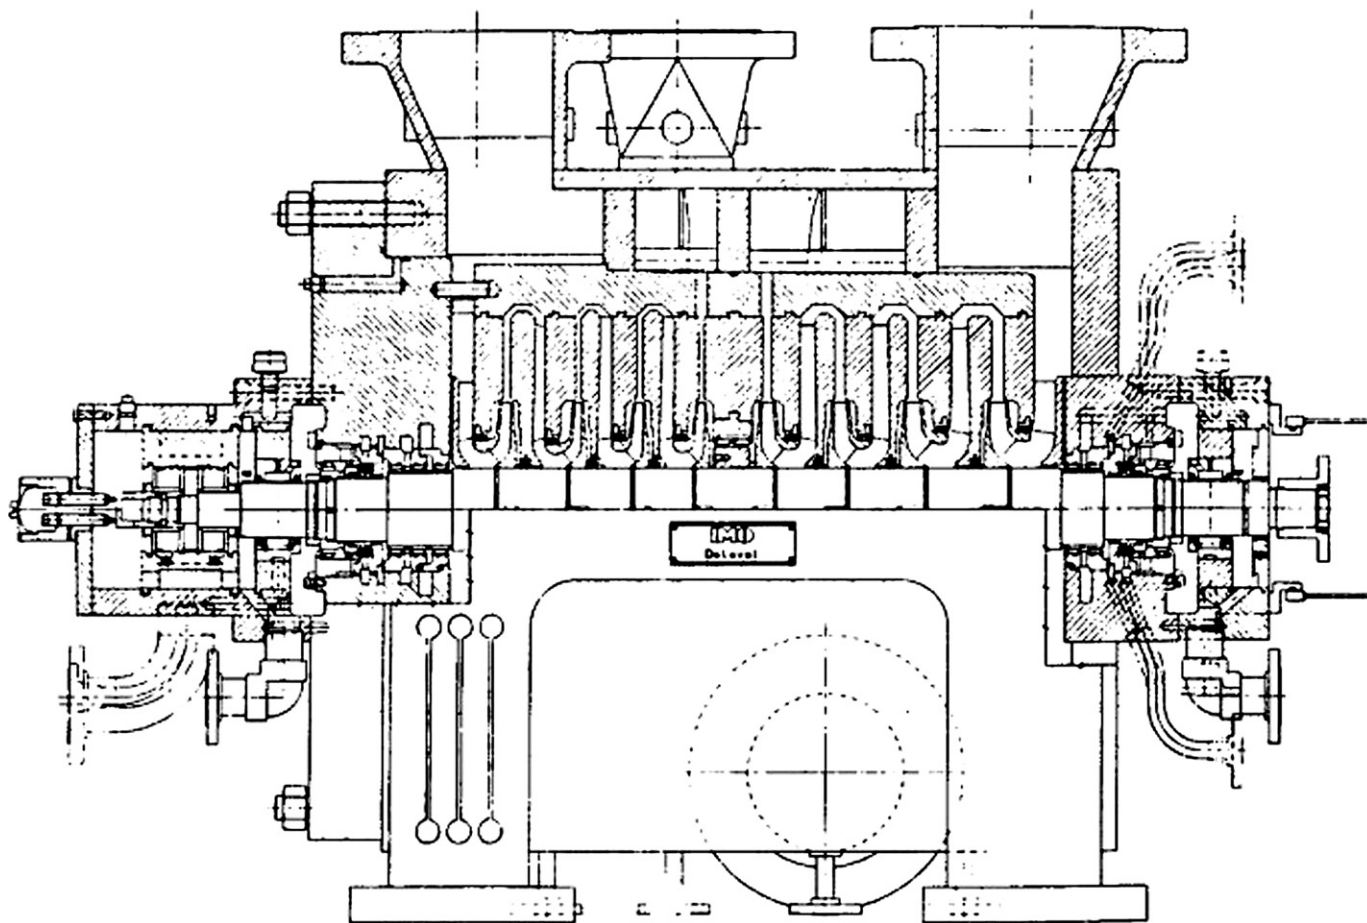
• Multistage barrel compressor (Courtesy of IMO Industries, Inc.)
